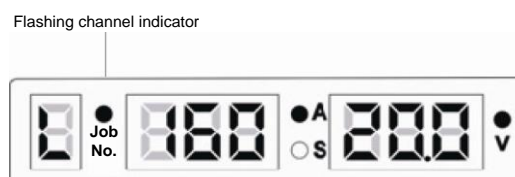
UI indicating that welding parameter adjustment ranges are locked
